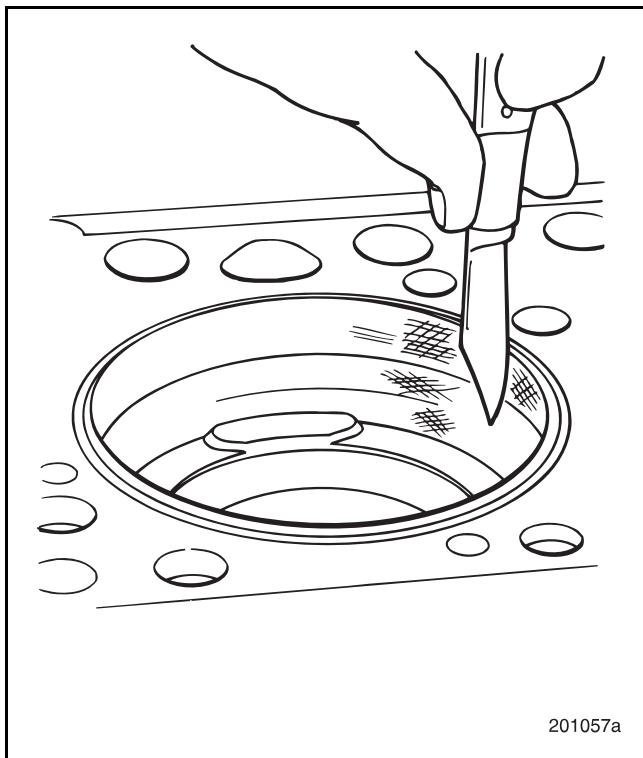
Carbon Removal from Cylinder Sleeves
